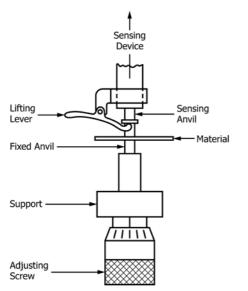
Measuring Apparatus A for Use with Cylindrical Master Standards for Gauge Setting
